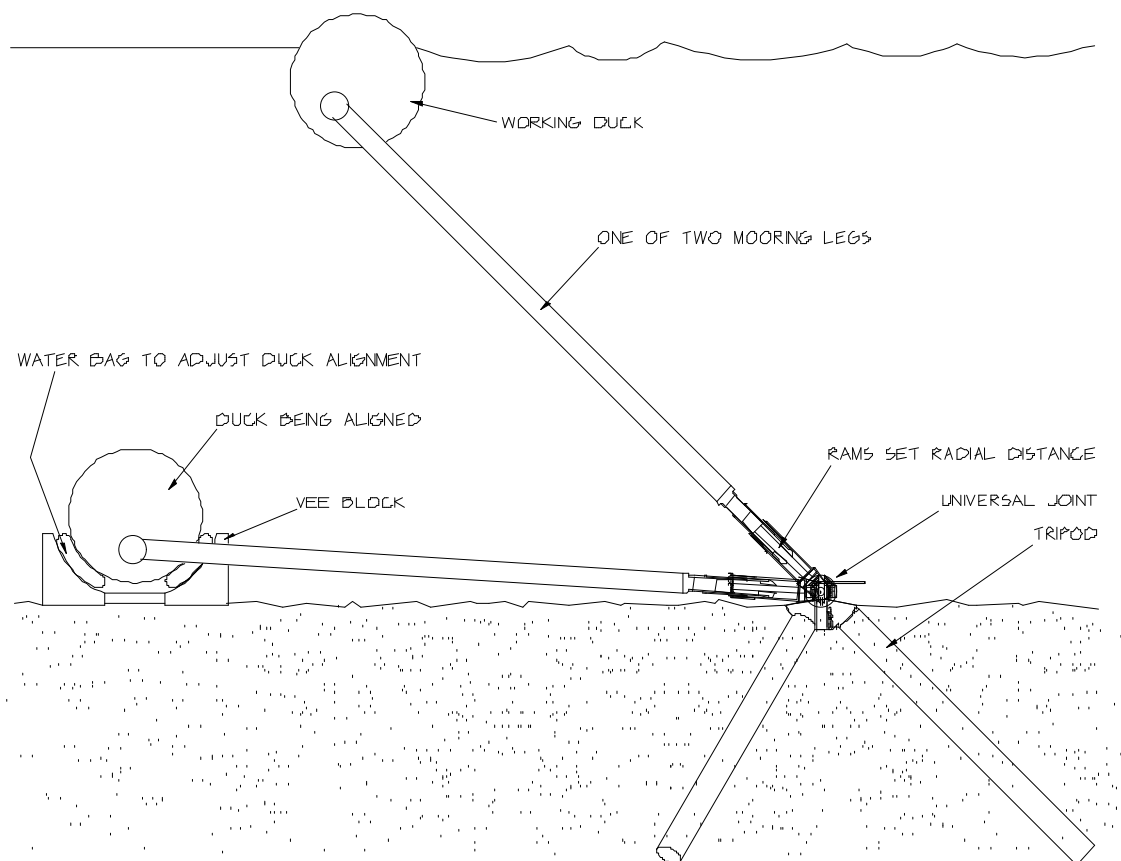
A composite view showing the fully flooded duck in the alignment position on its Vee-block and water bags and raised to the working position with half the water removed.
